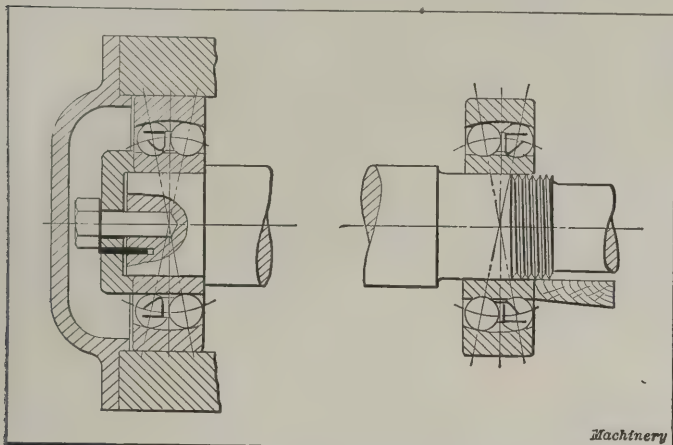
Plain End Cap. Fig. 6. Using a Piece of Wood to drive Bearing into Place
